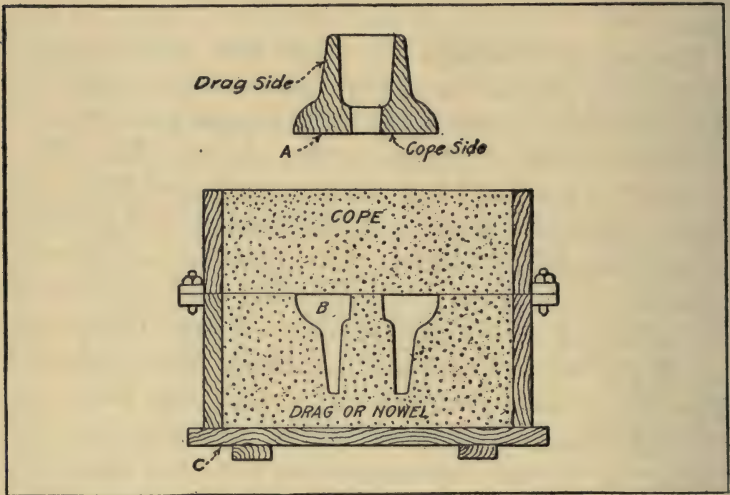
METHOD OF MOLDING A SIMPLE PATTERN
